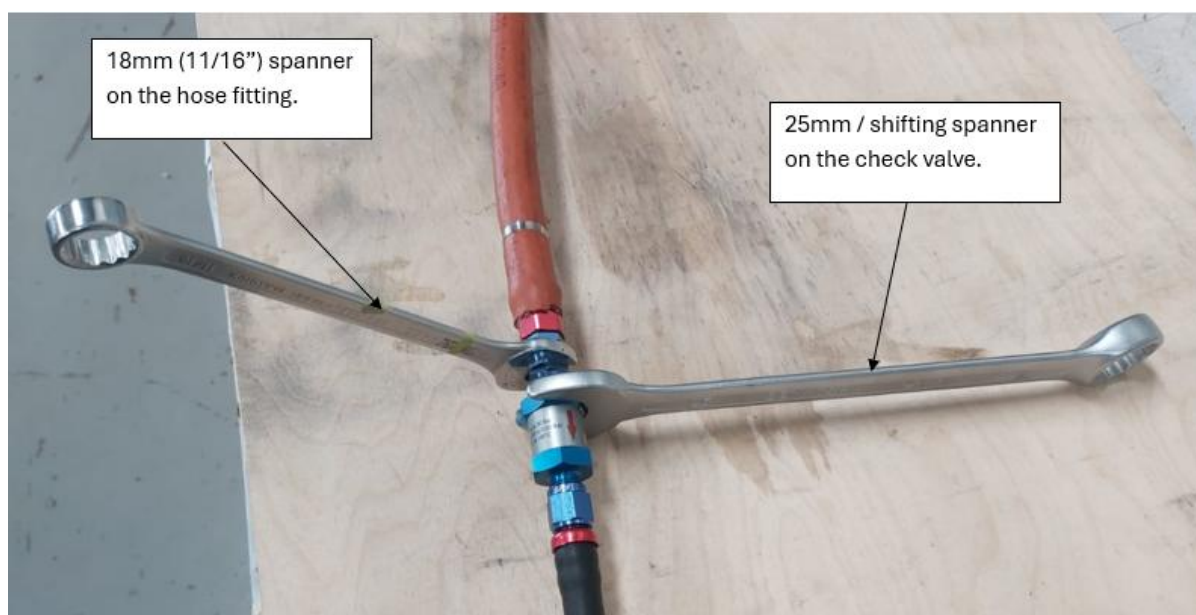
Correct way of loosening and tightening the check valve from the fittings.
